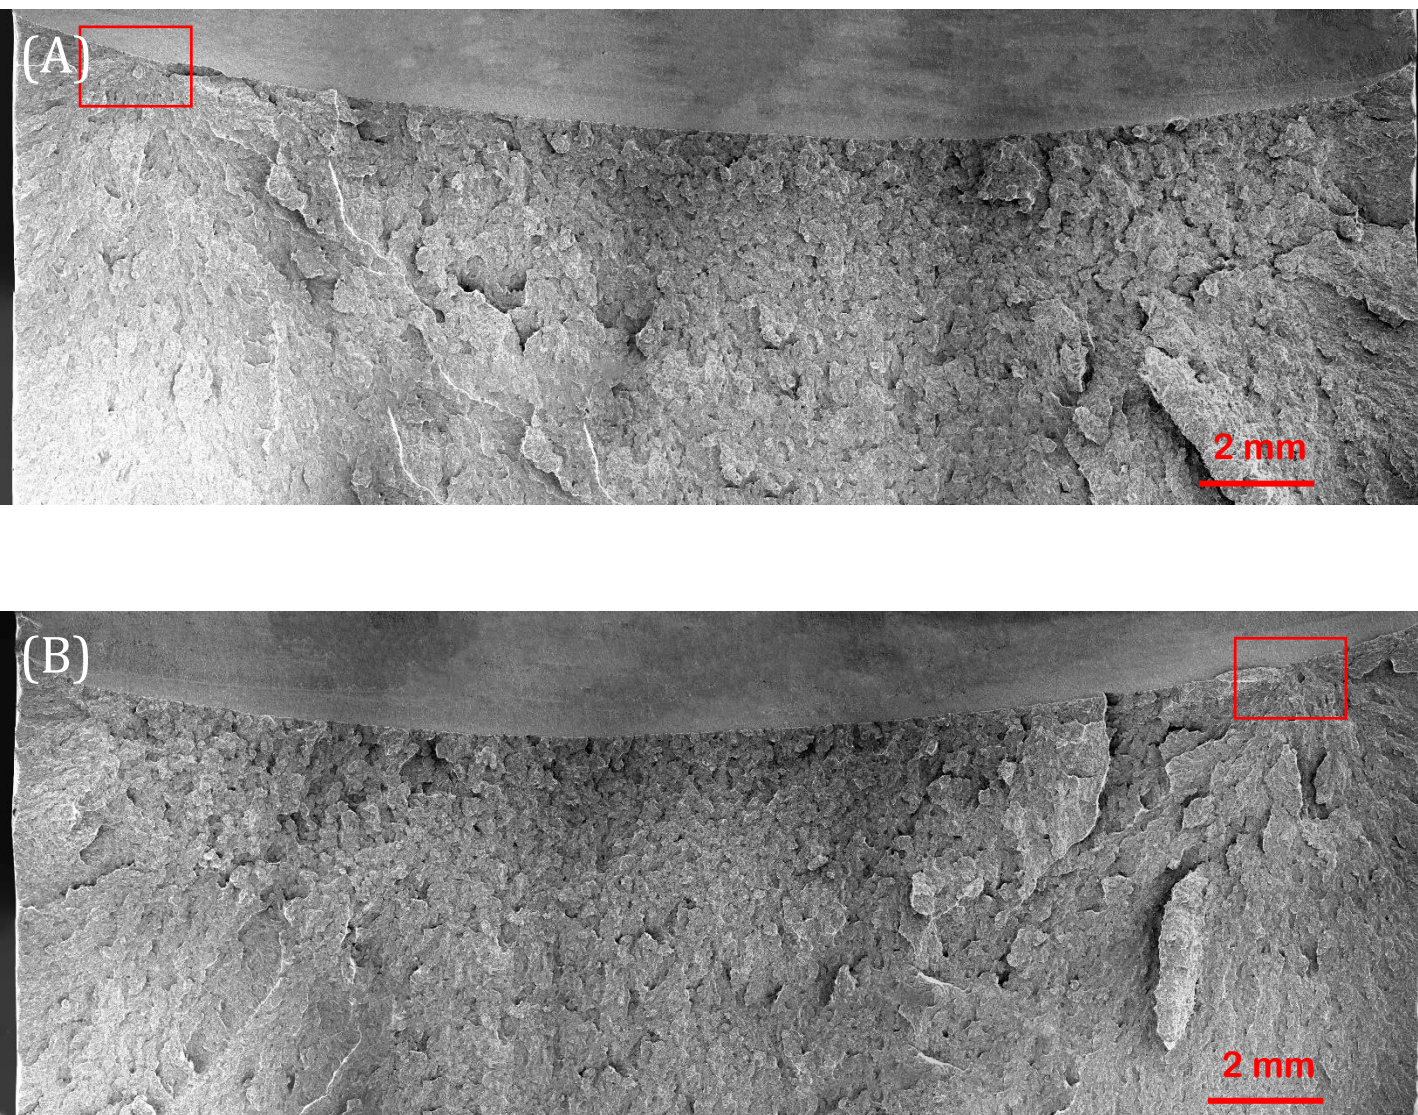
(a). Overview of fracture surfaces on a sharp-cracked specimen, designated CT HT2-07, tested at  $-120^{\circ}\text{C}$ . Red frames on matching halves (A) and (B) denote the most probable fracture initiation areas. Test results: Critical J-integral ( $J_c$ ) value of  $31.6\text{ kJ}/\text{m}^2$ , crack tip opening displacement (CTOD) of  $0.023\text{ mm}$ , local cleavage fracture stress of  $2290\text{ MPa}$  ( $n=0.1$ ), fracture initiation distance ( $X_o$ ) of  $25\text{ }\mu\text{m}$ , and an average stable crack extension of  $4\text{ }\mu\text{m}$ .
